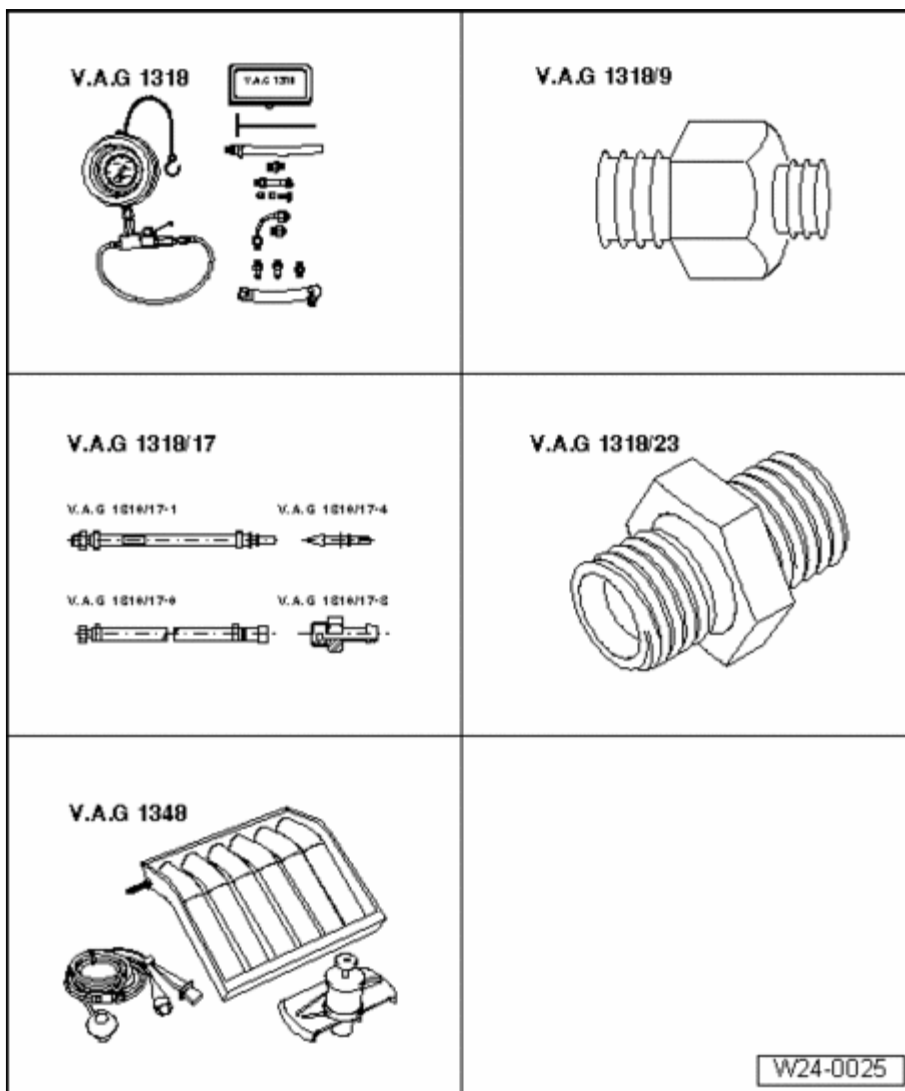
Identifying Special tools - Fuel Pressure Regulator And Holding Pressure, Checking (Engine
